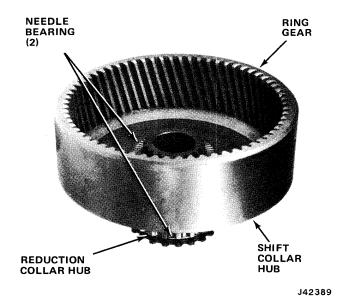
Ring Gear Installed on Reduction Collar Hub
